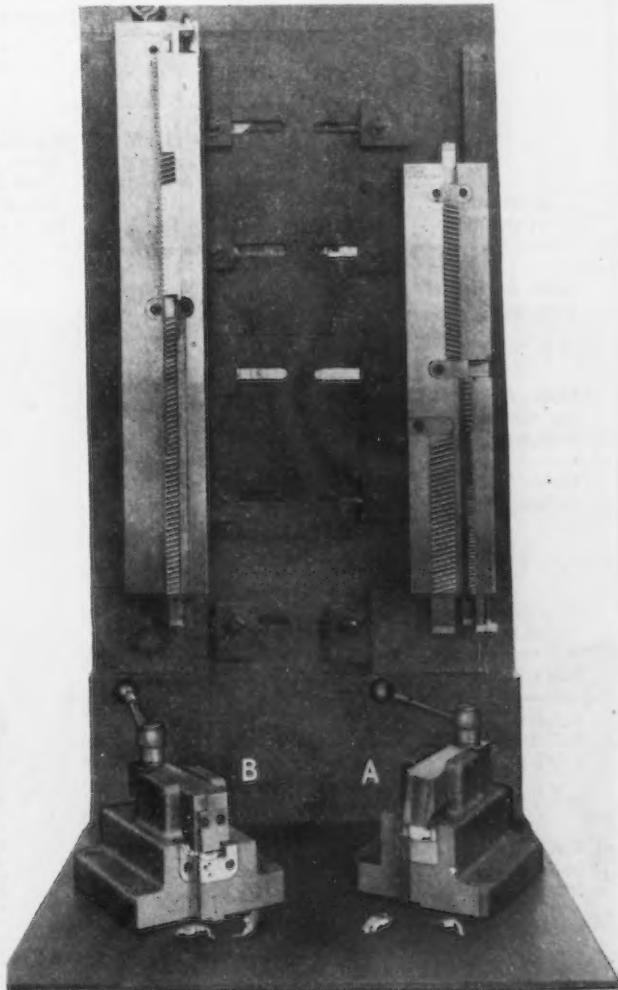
Cut and fixture for Oper. 7, broaching the bottom contour of the catch, are shown at A. Oper. 7A, broaching the inside of the arm and roughing out the slot is illustrated at B.
